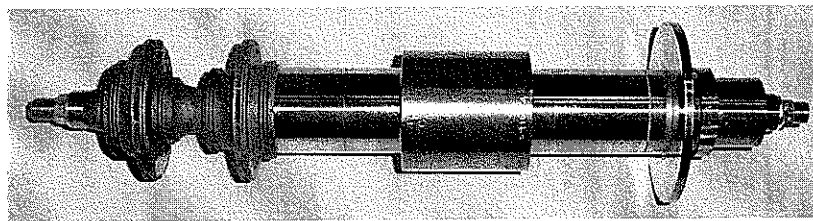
Design B Shaft with Two Impellers and Integral Permanent Magnet Motor Rotor
